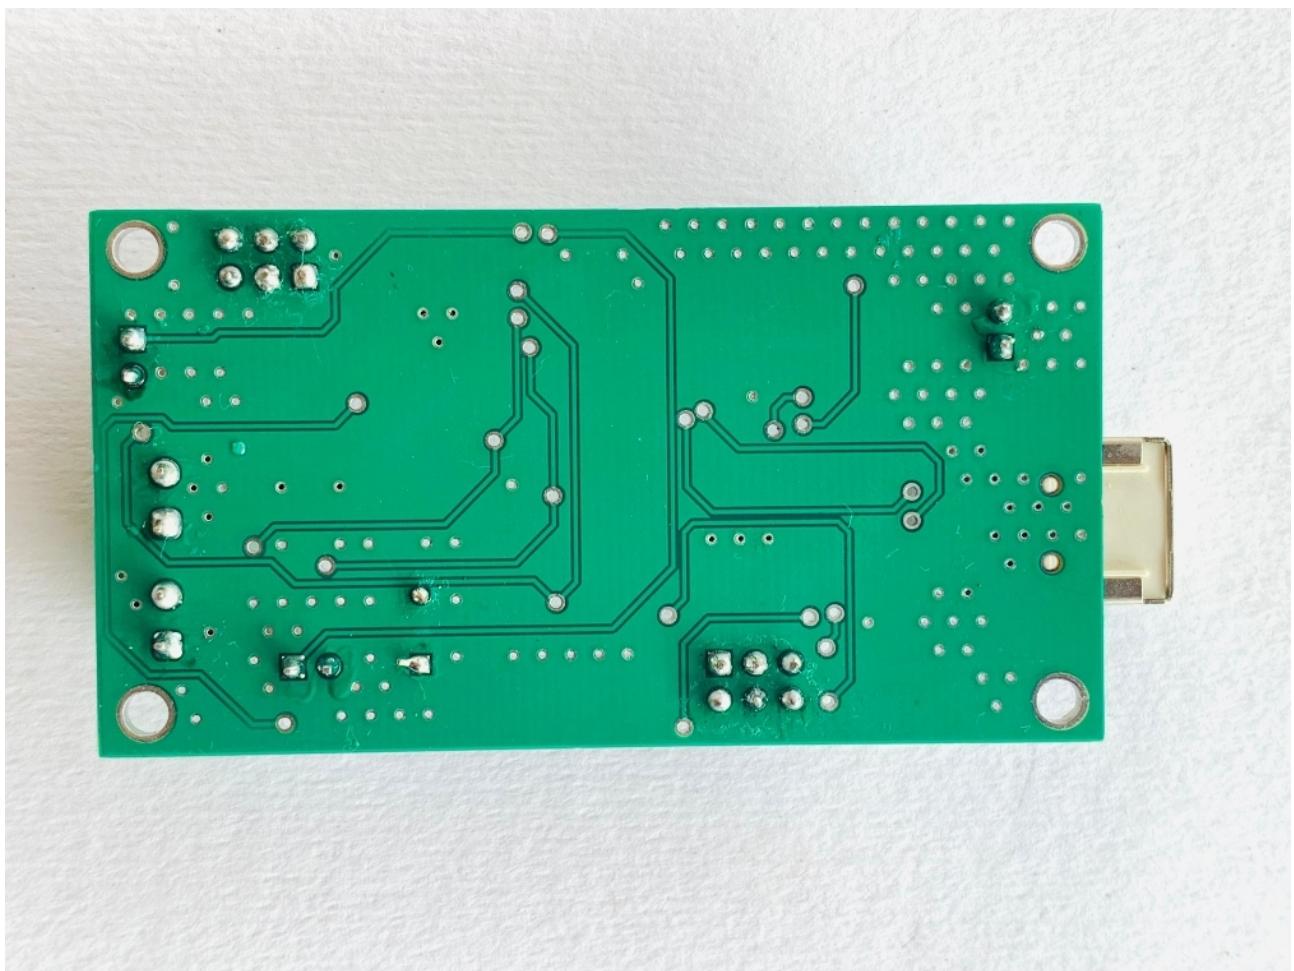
Soldered Main Cotroller PCB - Bottom
